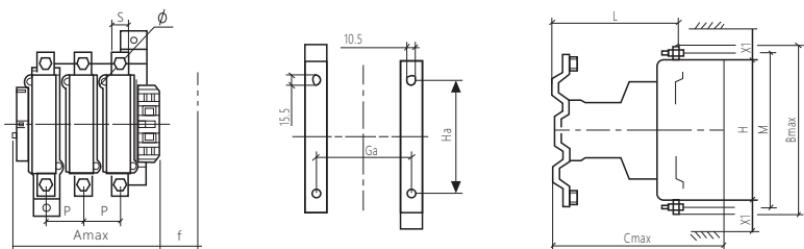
Outline and installation dimensions of NC2-630~800 AC contactors
